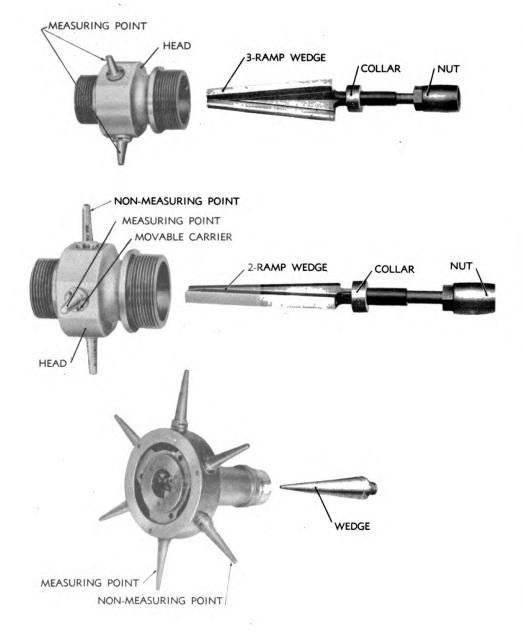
Head Tube and Wedge Operating Rod of 2-inch Lever-type Star Gage
